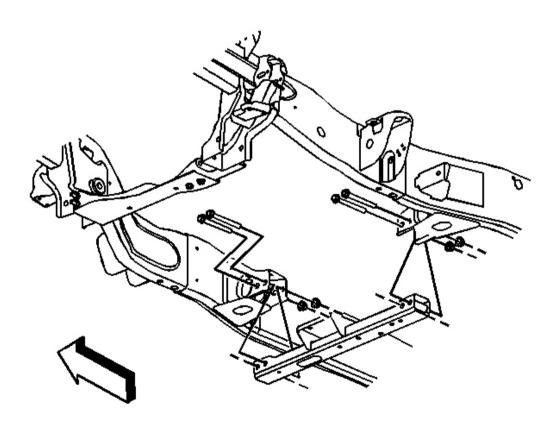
Rear Crossmember Courtesy of GENERAL MOTORS CORP.
